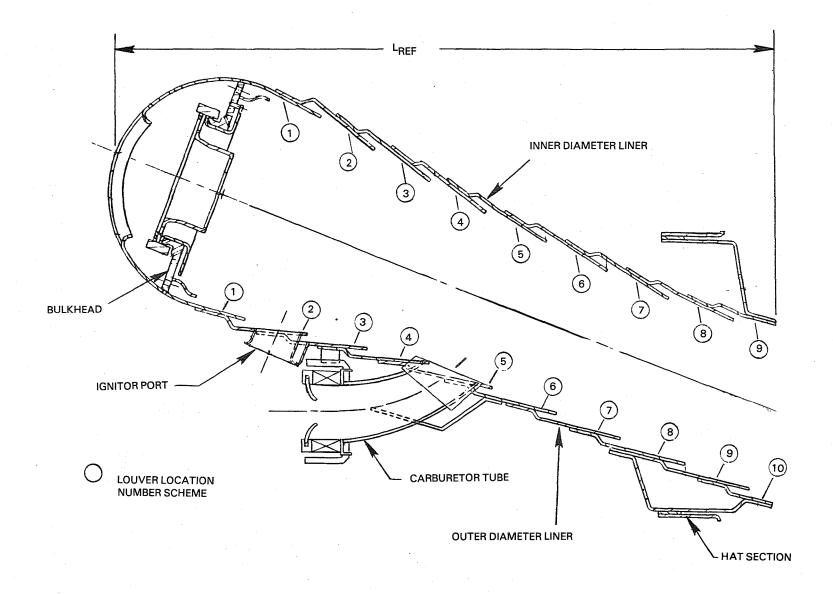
Conventional Sheet Metal Louver Liner Design
